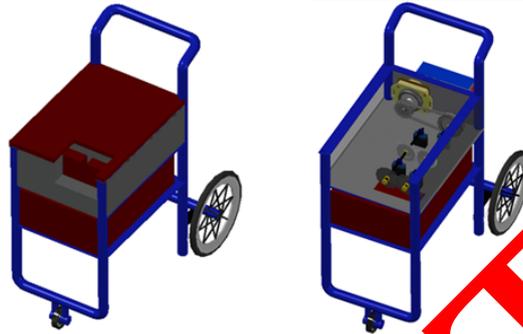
Red Onion (*Allium cepa* L.) Stem Cutting Machine Design and Perspective View.
